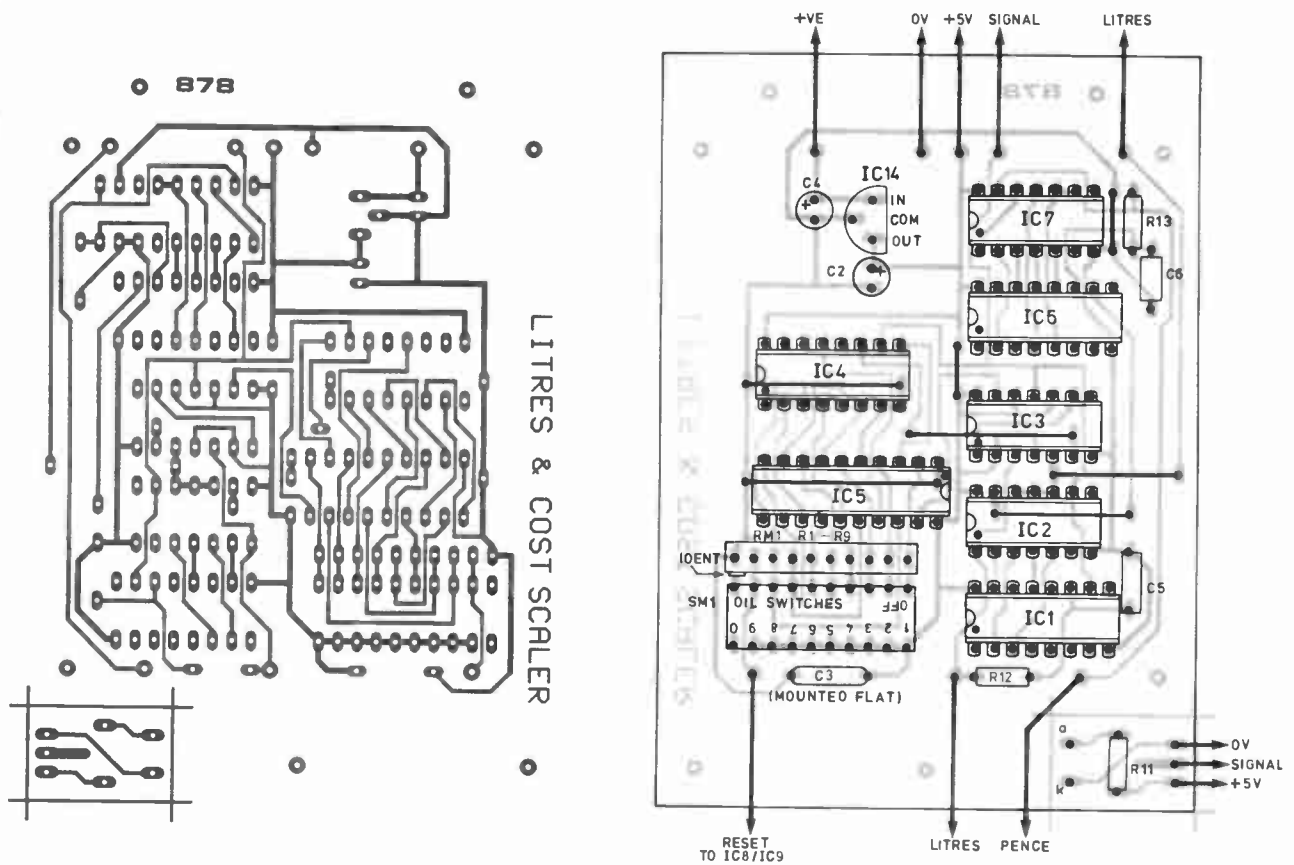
Printed circuit board component layout and full size copper foil master pattern for the Litres and Cost Scaler board. Note that the sub-assembly board, shown at one corner, is mounted trackside upwards on the Sensor module, looking at the connecting pins.
